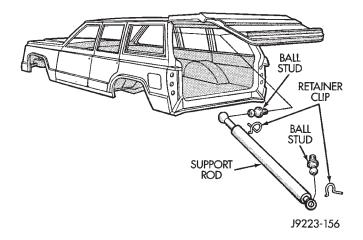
Support Rod, Retainer Clips and Ball Studs
